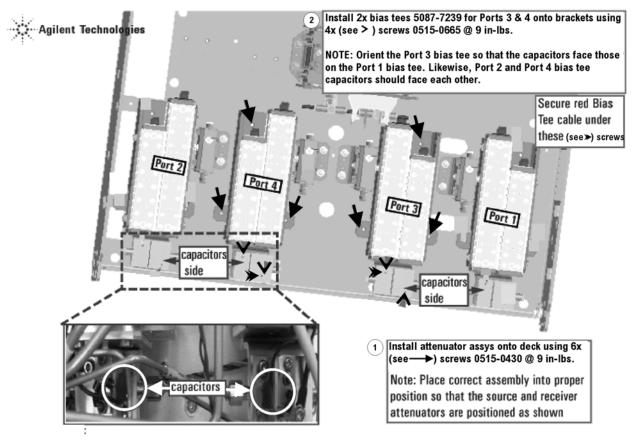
A35, A36 Source Attenuators Assembly and A43, A44 Receiver Attenuators Assembly
